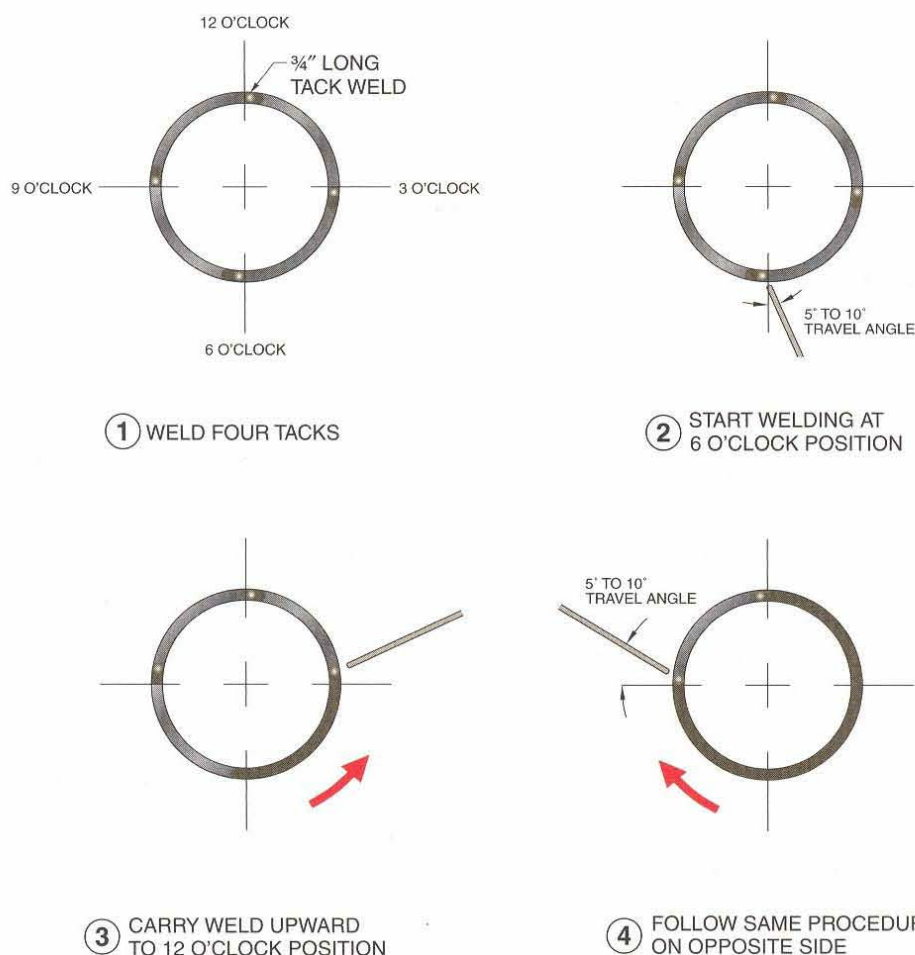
Uphill welding is used to weld thick-wall pipe. Uphill welding starts at the 6 o'clock position and works upward on both sides of the pipe.
